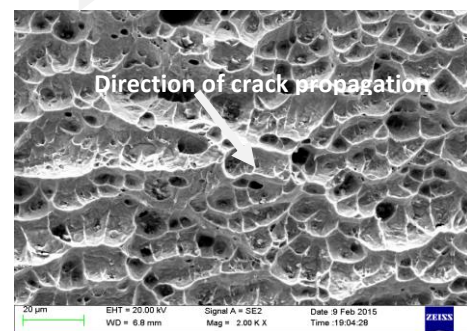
SEM micrographs of fractured Impact test coupons of GTA weldments
